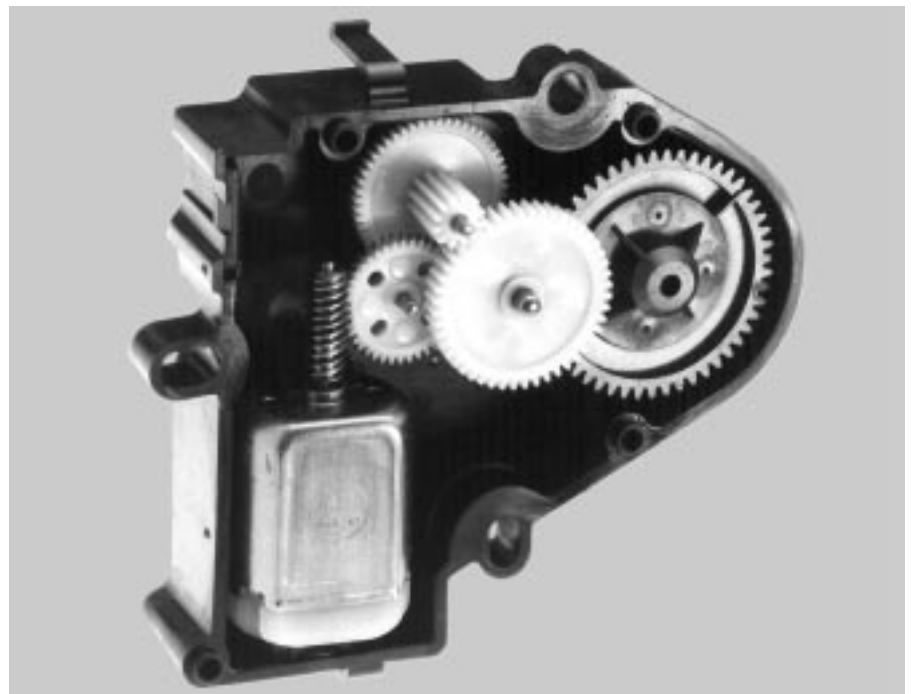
Small gear motor (worm/spur gear) for flap adjustment in automotive a/c systems, manufactured by Bühler Nachfolger GmbH, Nürnberg, Germany
